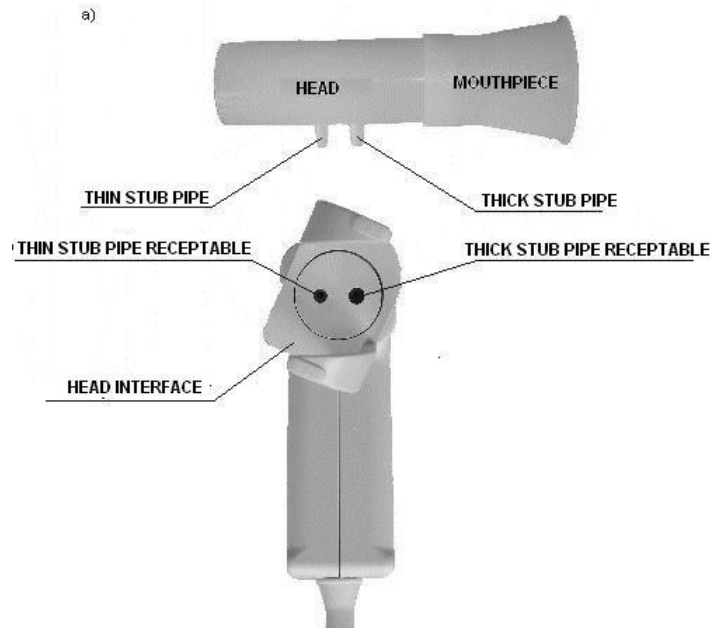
Pneumotachographic head with a mouthpiece and a holder
